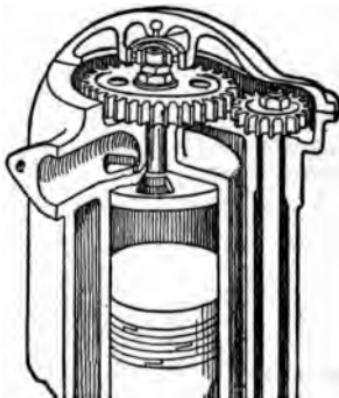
The Dawson engine, an early example of the sleeve valve principle. The valves are in the side of the cylinder. The piston carries a sleeve extension upward, as shown, and is rotated by skew gears working from the crank. Spark plug at a relief cock at *c*.
